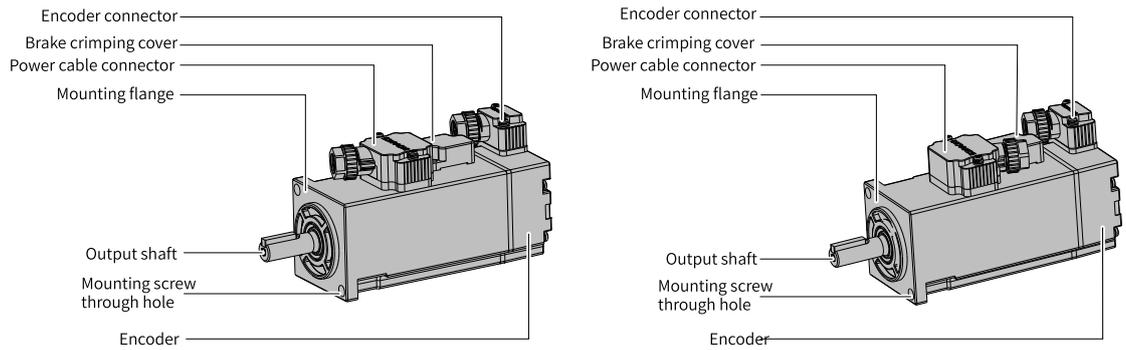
Components of a terminal-type servo motor (Left: motor with front cable outlet; Right: motor with rear cable outlet)
